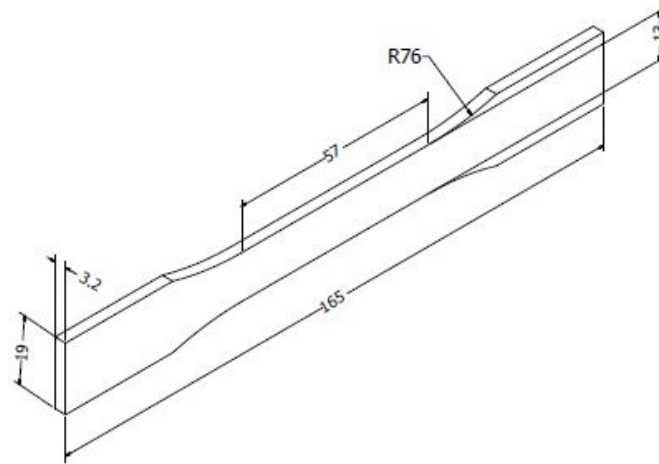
Tensile test specimen dimensions as per ASTM D638:2010.
